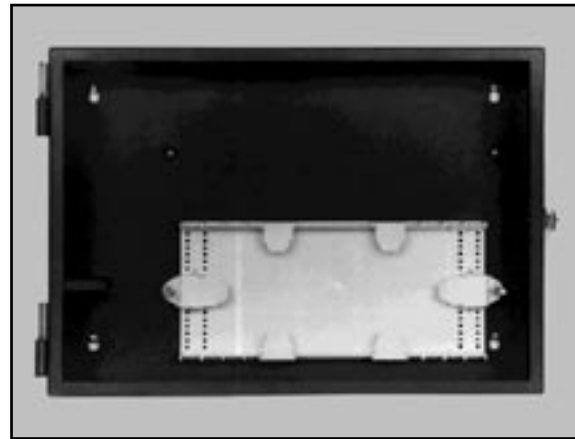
PLACEMENT OF TRANSITION ASSEMBLY IN REAR SECTION (FOR CABLE ENTERING TOP OF CABINET)
